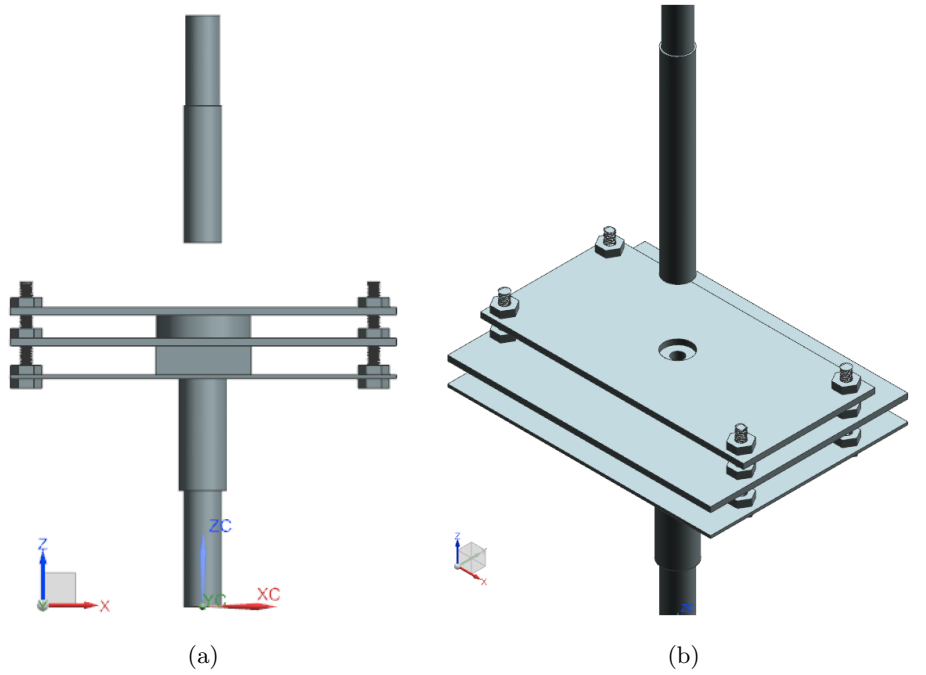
Test rig modeled (a)Front view (b) Isometric view
